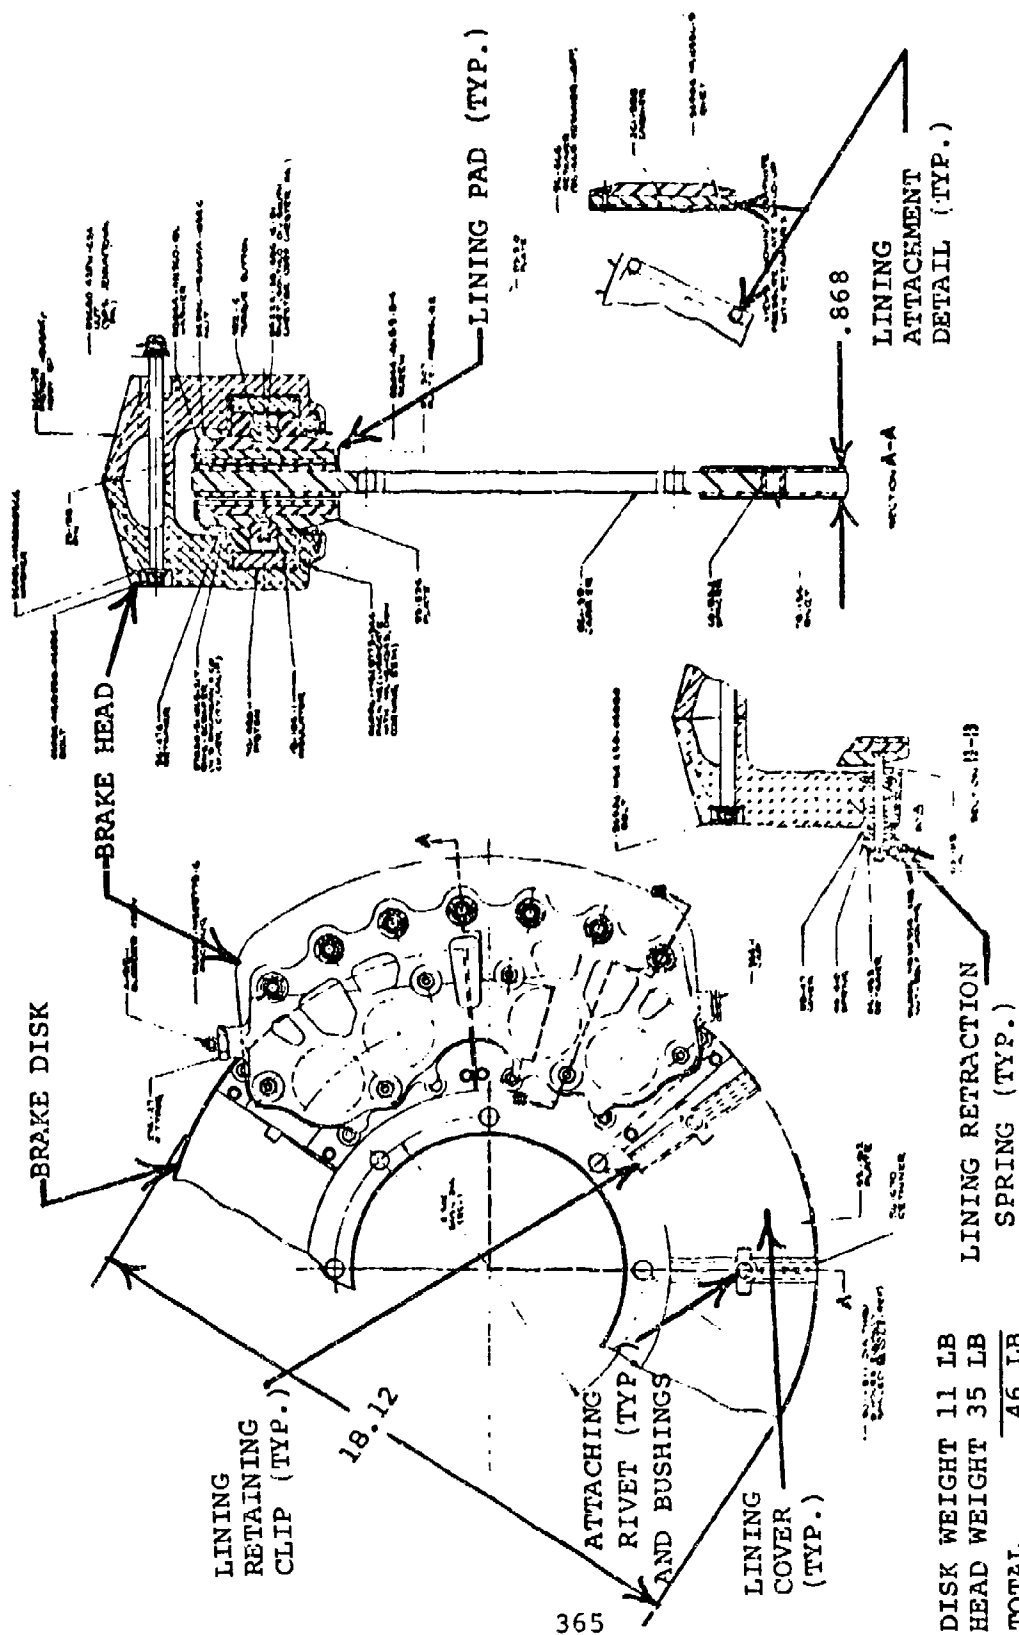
Carbon/Graphite Lined Beryllium Brake Disk Assembly.
